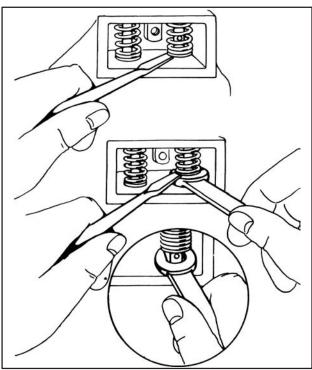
REMOVING VALVES AND REPLACING VALVES
